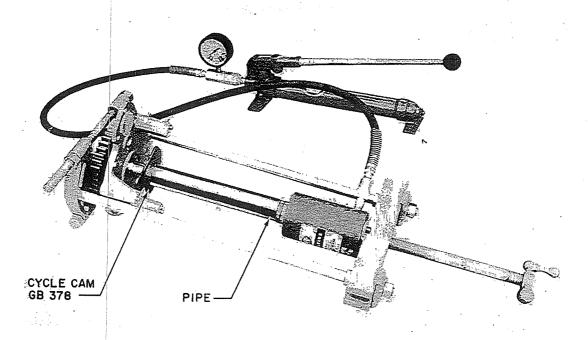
1 to 1 Shaft, Installation of Cycle Cam GB378
